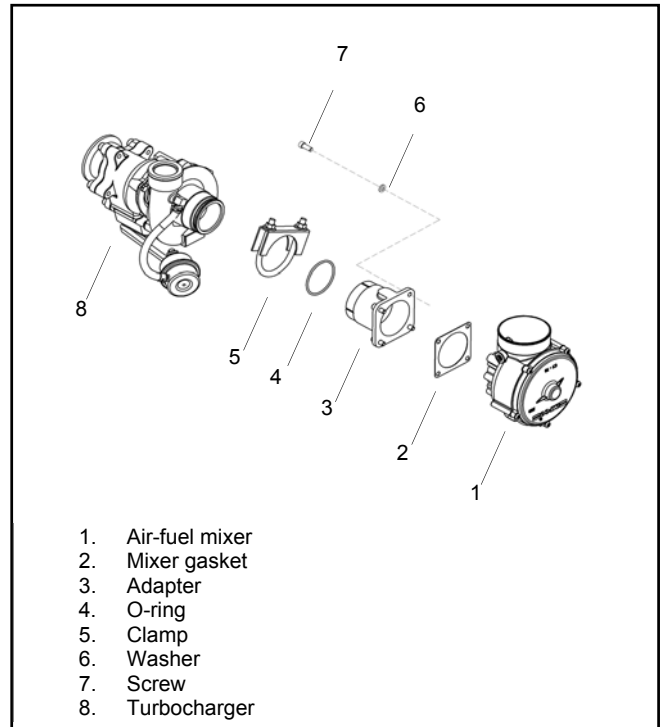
Air-Fuel Mixer Exploded View, KG2204T
